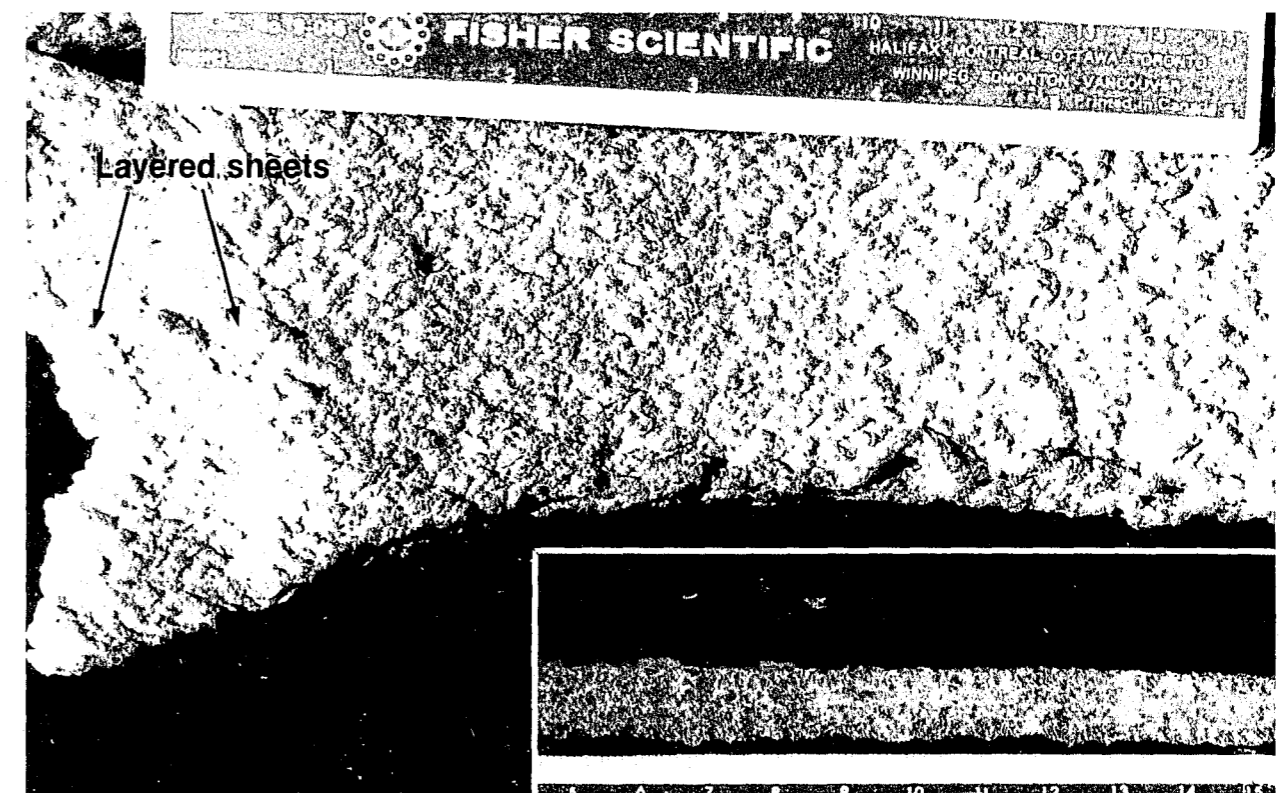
Final pass of remilled crepe rubber through mill. Insert illustrates layering effect.
